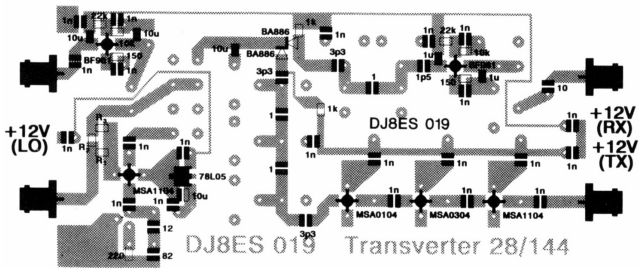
Component layout for the 2m transverter showing the track side of the PCB and the positions of the SMD components
